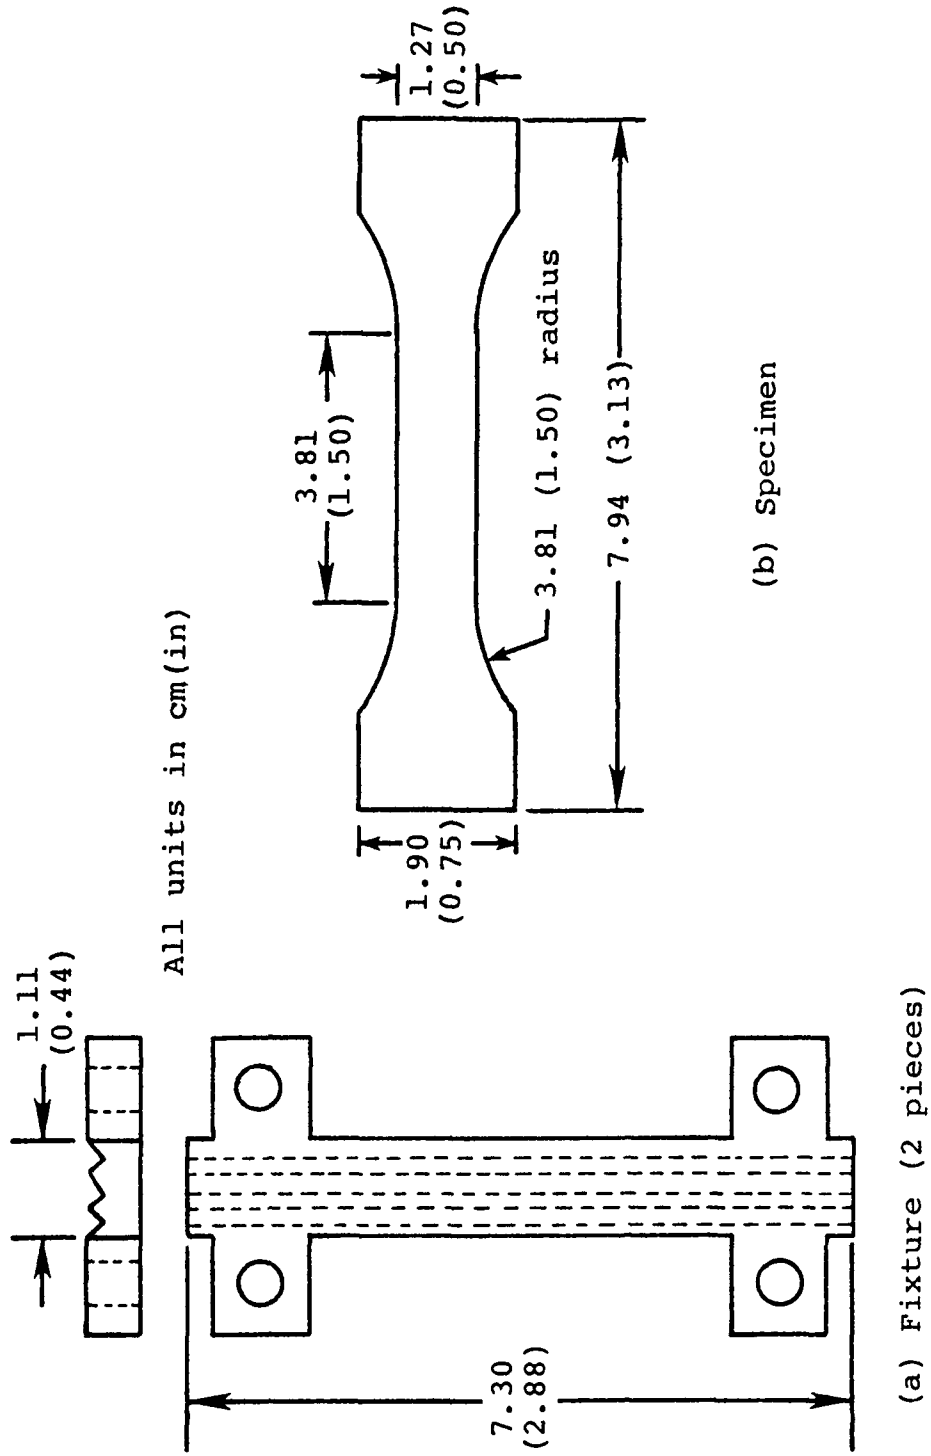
ASTM Dogbone Specimen with Reinforcing Fixture
